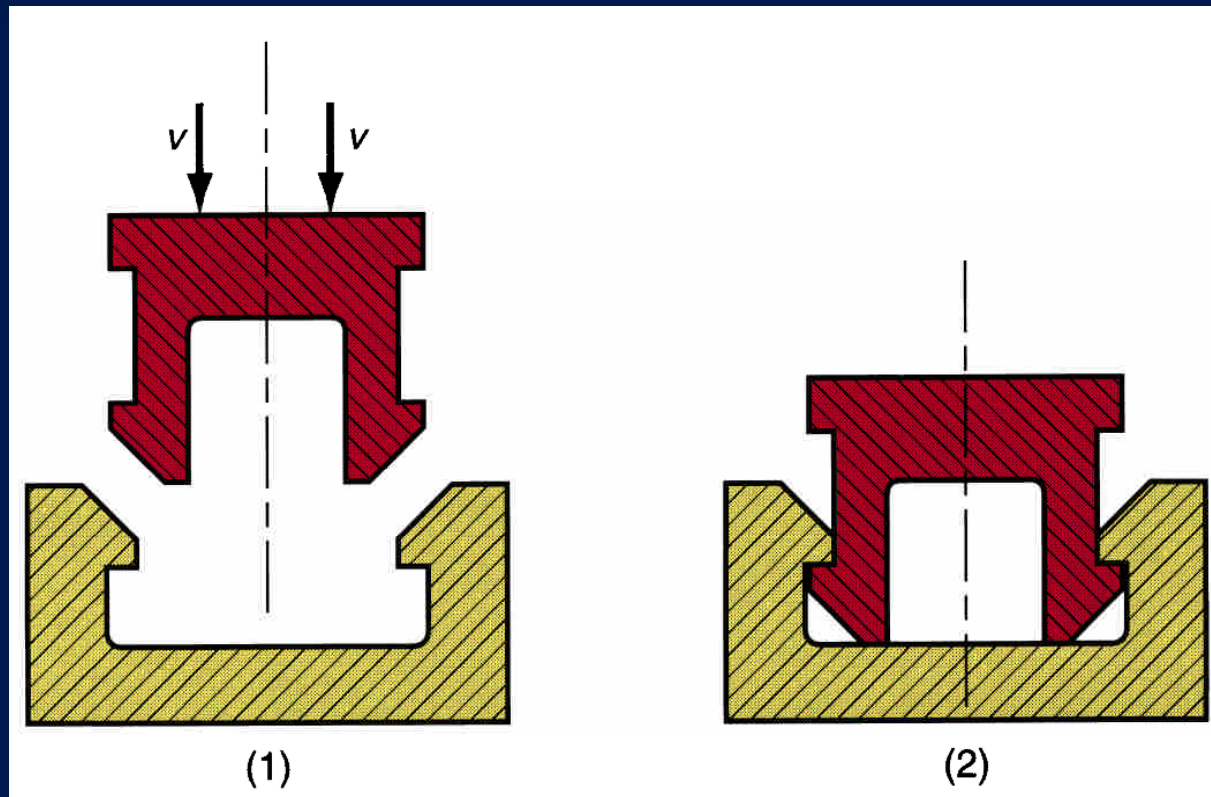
Snap fit assembly, showing cross-sections of two mating parts: (1) before assembly, and (2) parts snapped together
